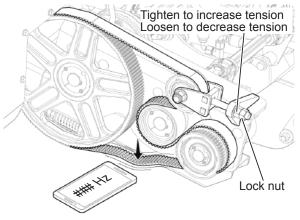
Feed Auger Drive Belt Tension Adjustment
